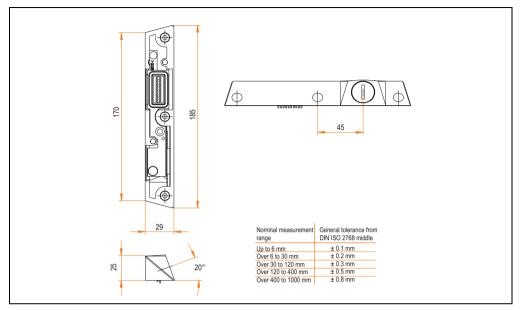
Dimensions - USB extension cover 5AC800.COV2-00
